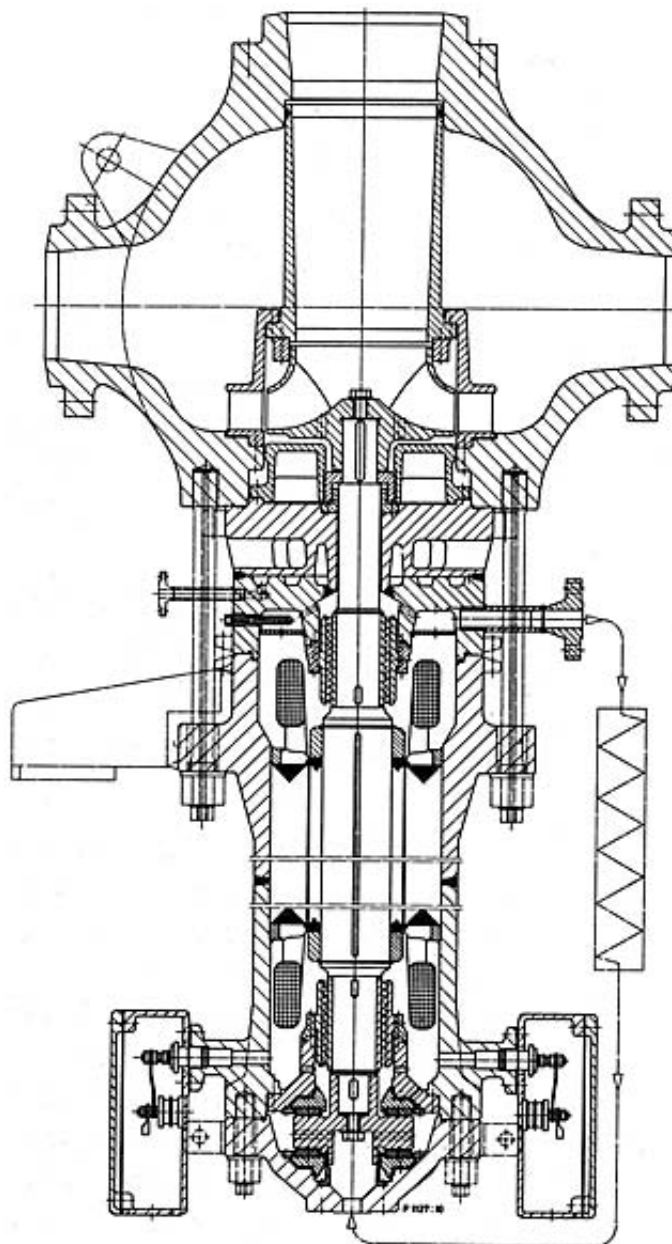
Plain pump shaft bearings of a glandless boiler circulating pump
